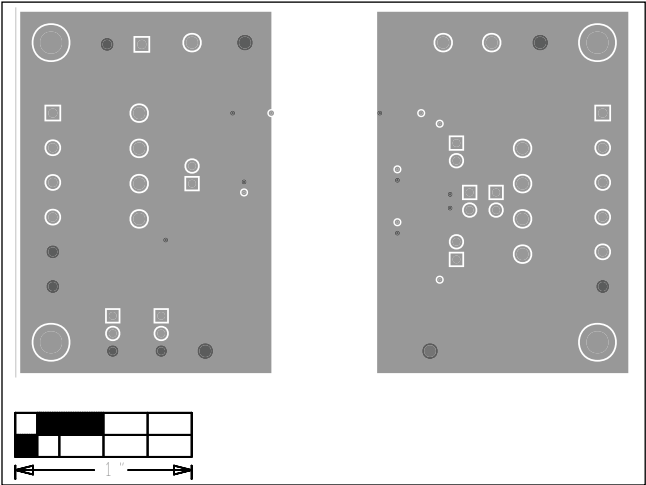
MAX148X2 EV Kit PCB Layout—Internal Side (Ground)
